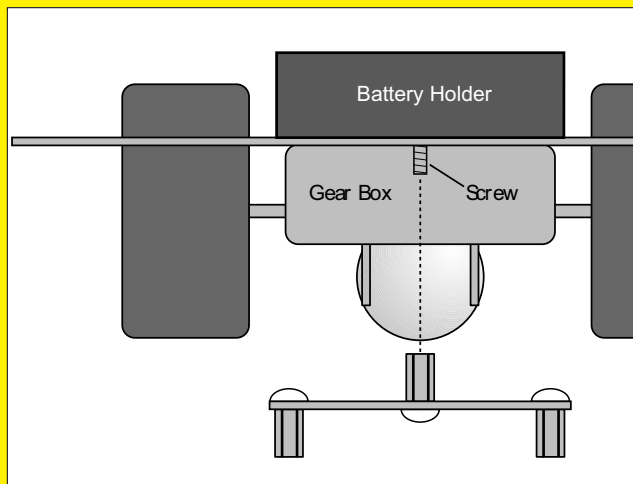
Front view of OctoBot (some details omitted for clarity). Mount the support bar to the bottom screw on the robot.
